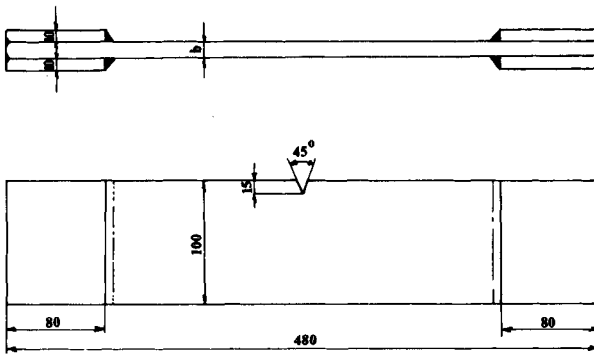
Three-Points Bend Sen-Specimen for Impact Testing
